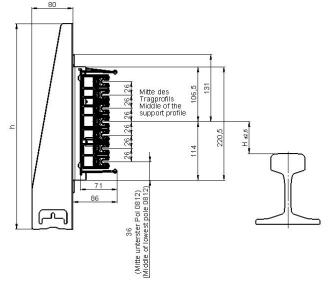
Dimensions of ProShell 206 system holder with Conductor Rail System 0812
